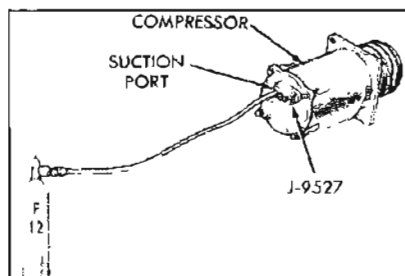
Leak Testing Shaft Seal and Seal Seat O-Ring
